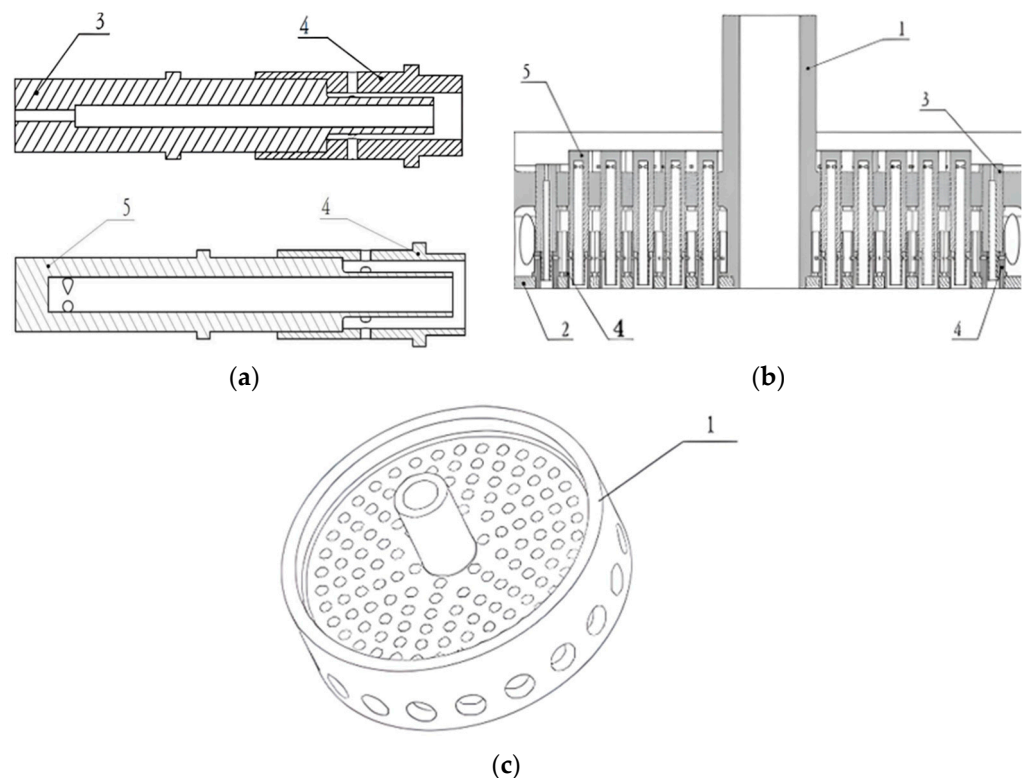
Combined mixing head design for a pre-burner. (a) Cross sectional view of direct current nozzle and open end swirl injection elements; (b) Cross sectional view of a mixing head comprised fuel injection elements; (c) Schematic diagram of the mixing head structure. (1)-Mixing head cover; (2)-Annulus ring structure; (3)-Direct discharge current injector; (4)-Outer annulus injector recess space; (5)-Open end swirl injection element. Reproduced from CN Patent No. 107939551B in Ref. [200].
